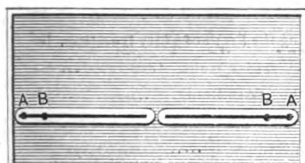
Showing Position of Supports when Drawer is Closed.
